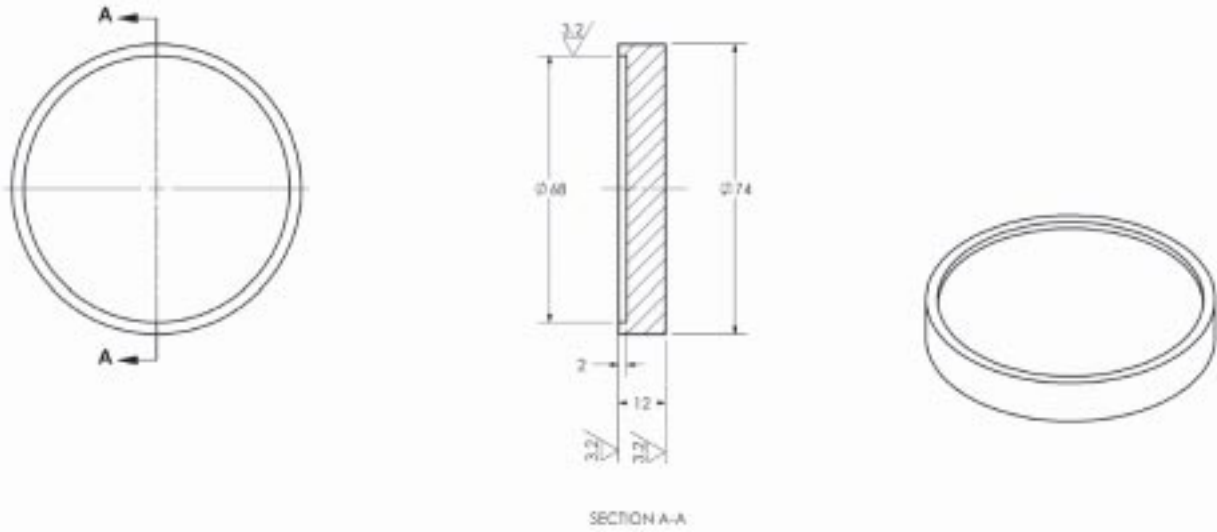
1/2 Shaft Seal Flinger Tool (Section 180-0020, SUSPENSION SYSTEM- FRONT SUSPENSION)
